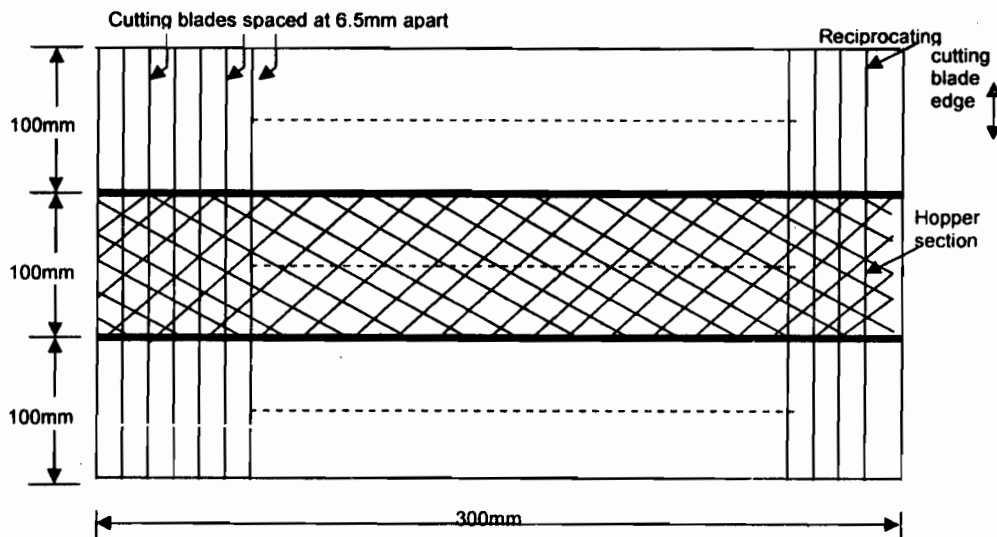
Cutting Blades Arrangement and Cross - Section of Meat Hopper
